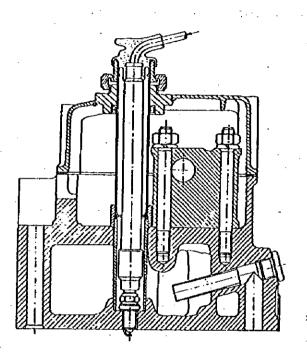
Mounted Sparking Plug Source : Mielec Engines Co.
